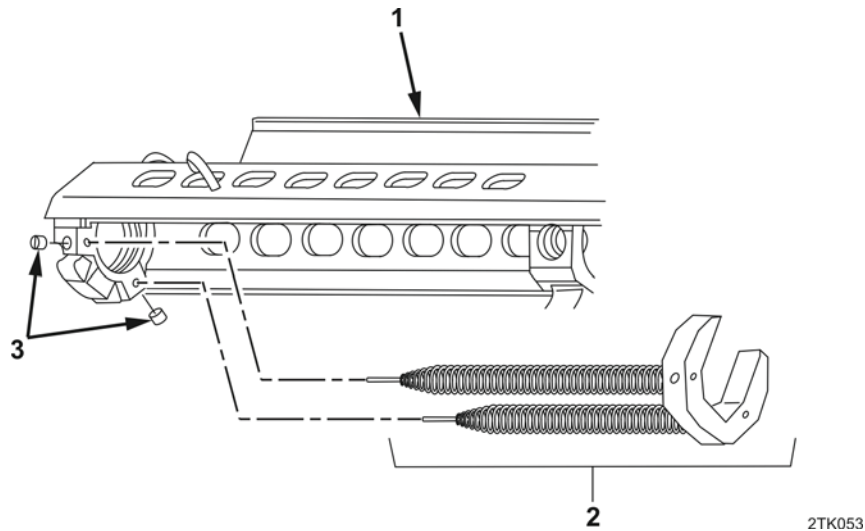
Barrel Spring Screws and Upper Receiver Assembly.
